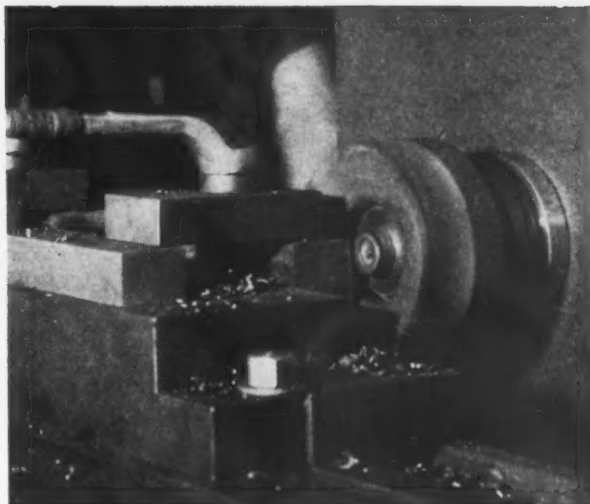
The face milling operation shown here replaces the straddle milling shown in fig. 58 and permits of higher feeds and speeds. Reduced setup time, however, must be balanced against earlier blade deterioration.
